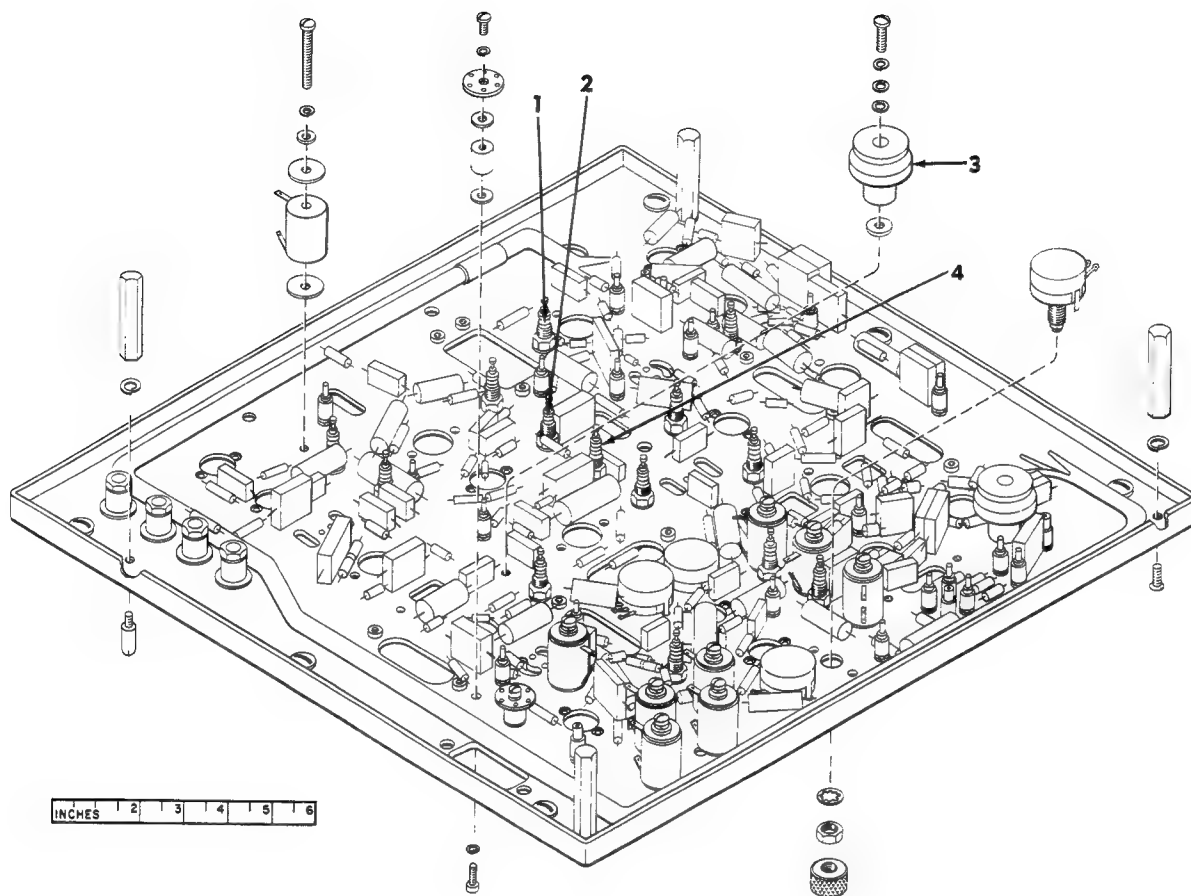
Coder, radar, guided missile (8159347)—partial exploded view
